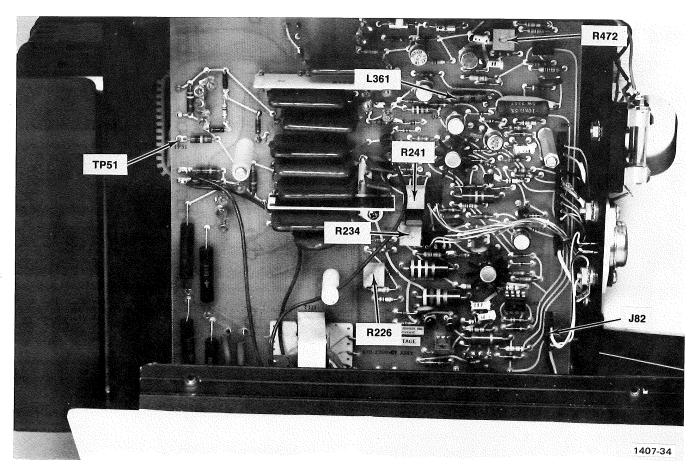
Locations of test points and adjustments on the HV and Z-axis board.
